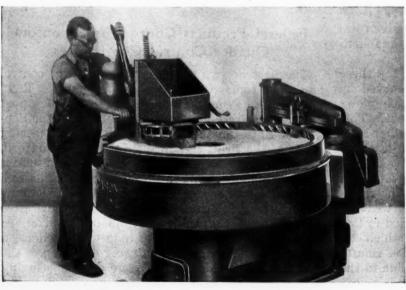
Grinding Two Sides of a Blower Housing, Using a Fixture for the Second Operation
